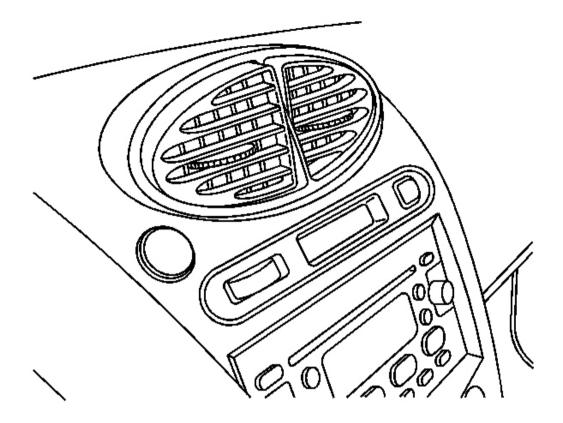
View Of Instrument Panel (I/P) Dimmer Switch Courtesy of GENERAL MOTORS CORP.
